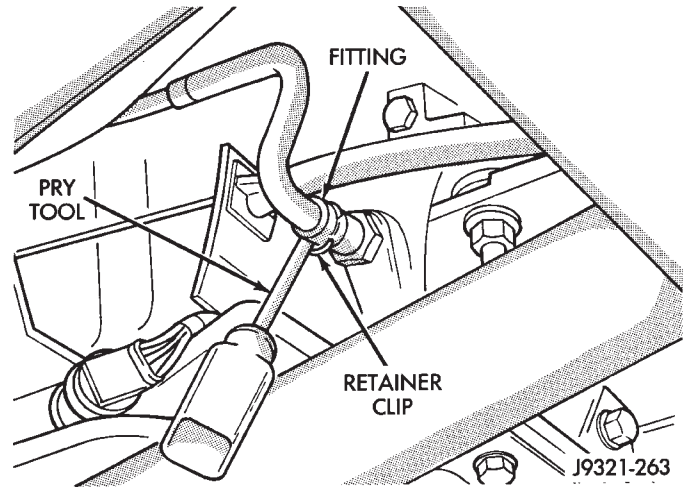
Removing Retainer Clips From Quick Disconnect Fittings
